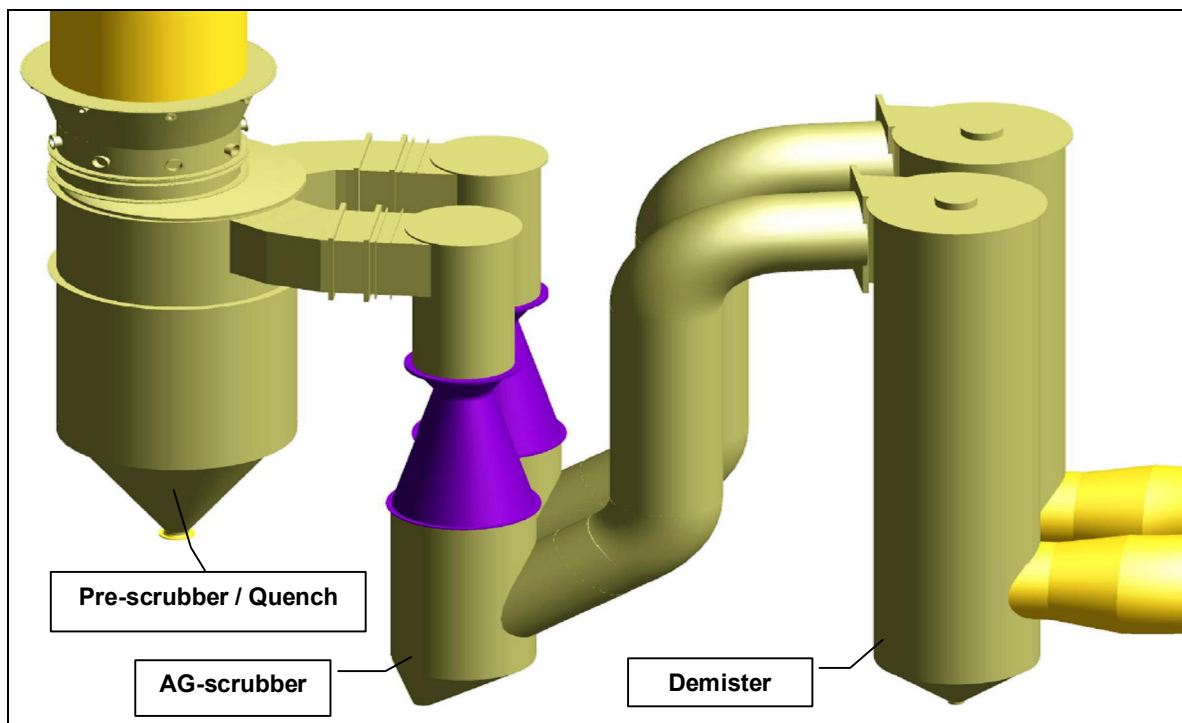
Plant items of the new AMT Kazakhstan Steel plant dedusting facility
